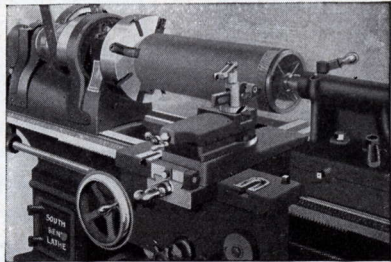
Machining a large wrought iron pipe in the lathe showing the application of the pipe centers.
